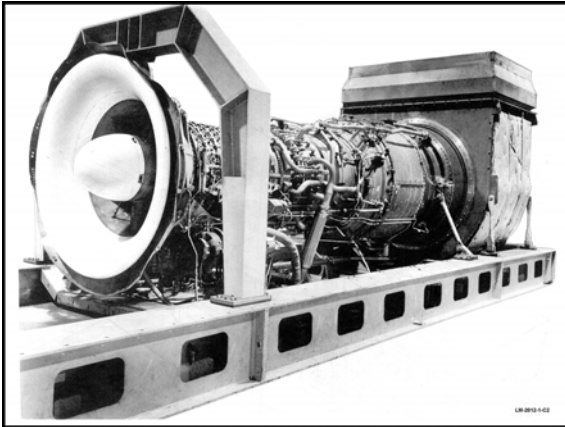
Gas Turbine Assembly - Left Side (Typical)
